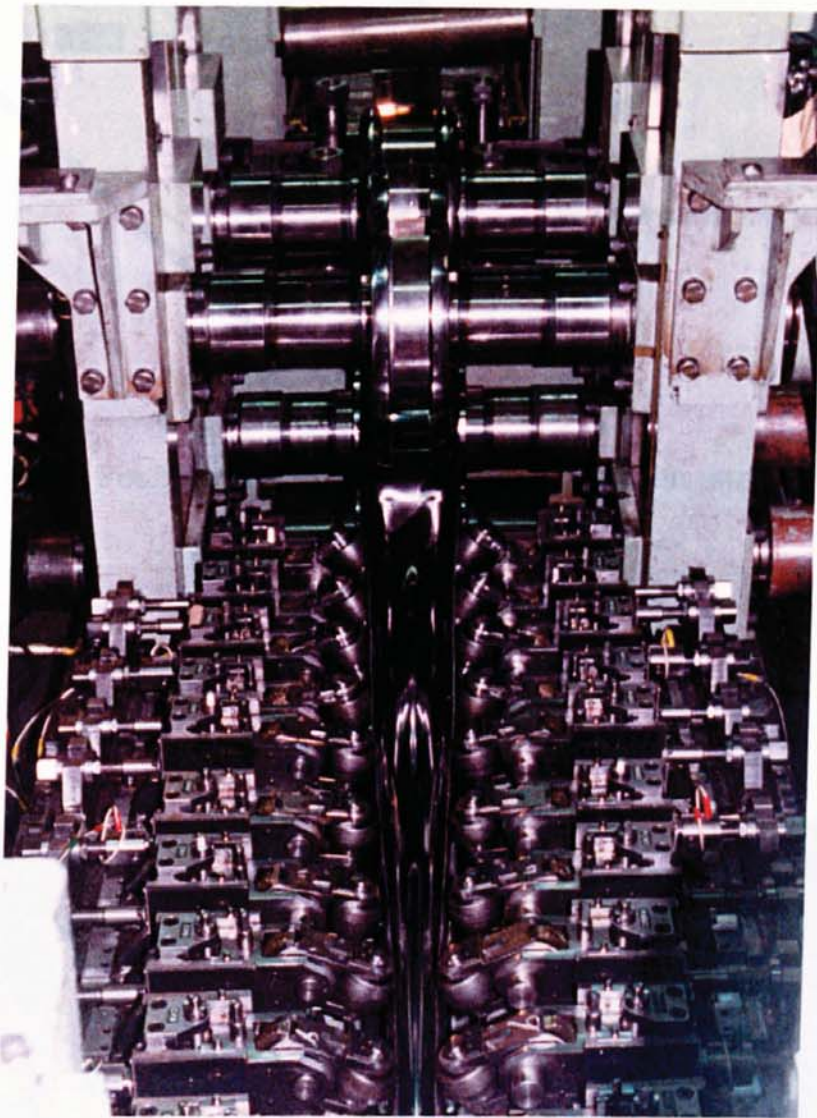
Appearance of the strip deformation in cage roll forming stage of the CBR forming pilot mill
